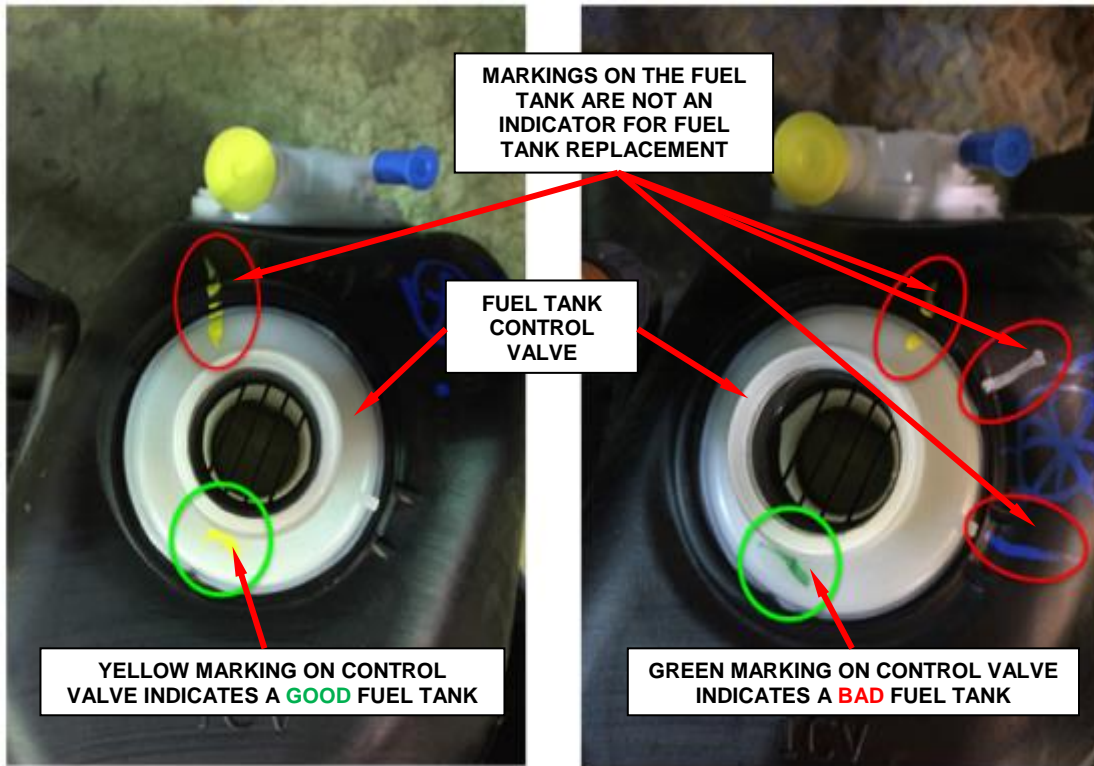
Inspect Fuel Tank Control Valve for Marking
